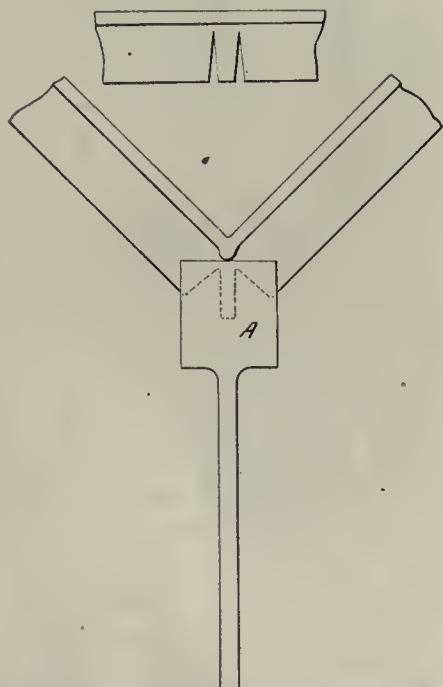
GLUT WELDING EXTERIOR ANGLE.
